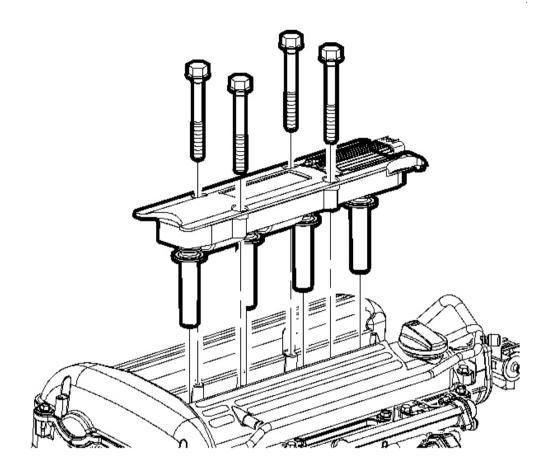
View of Ignition Module Housing Assembly With Spark Plug Boots Courtesy of GENERAL MOTORS CORP.
